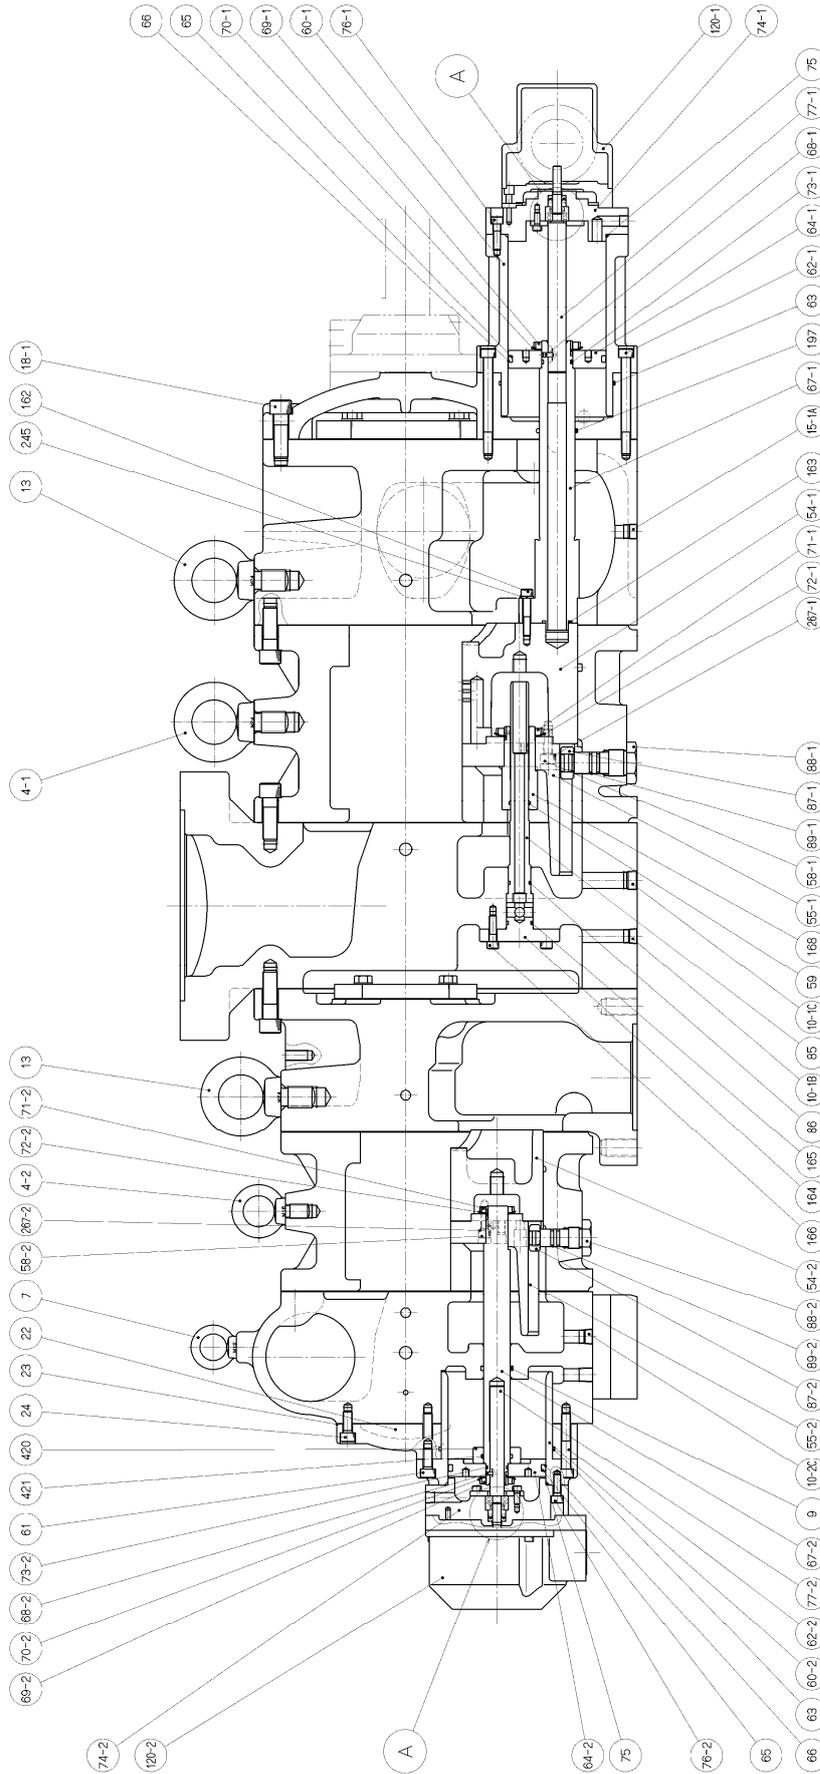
2016SSC Assembly Sectional View (Vertical)
